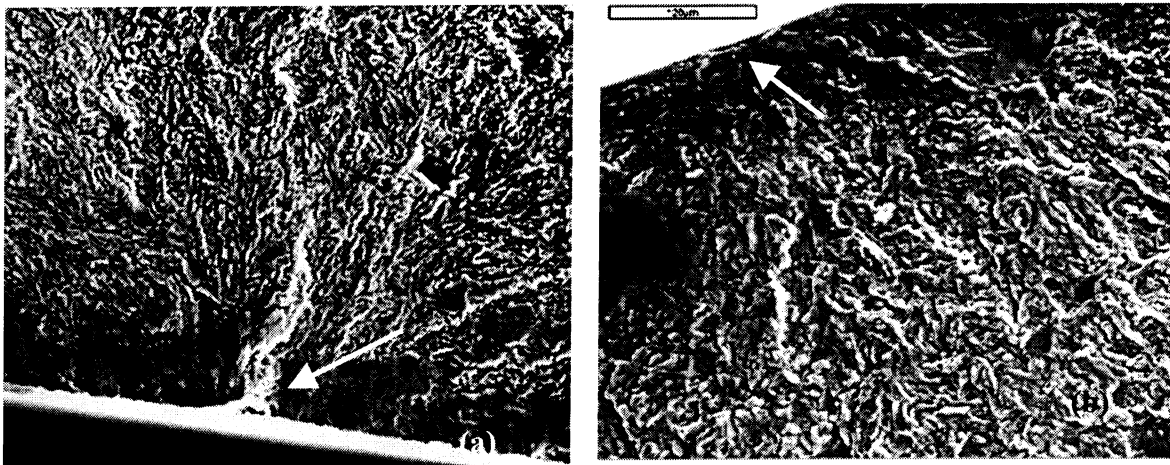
Examples of fatigue crack origins at the surfaces of flapper valve strip material.
